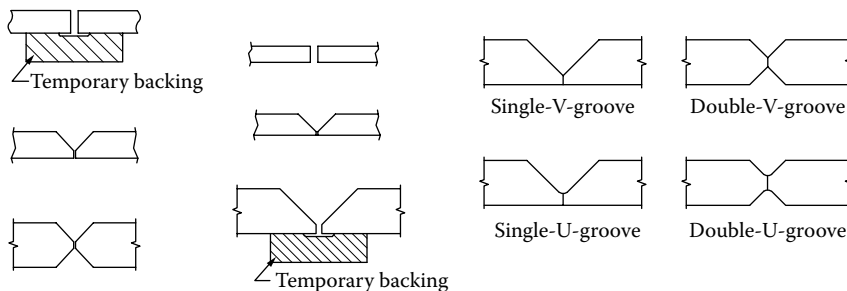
Typical joint design for arc welding of aluminum.
